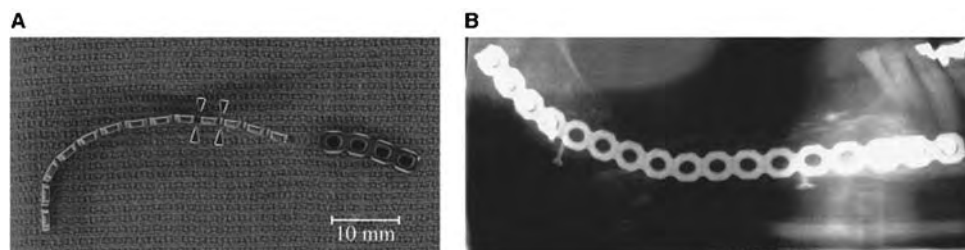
(A) Photograph of fractured mandibular plate and (B) X-ray showing plate in situ.
